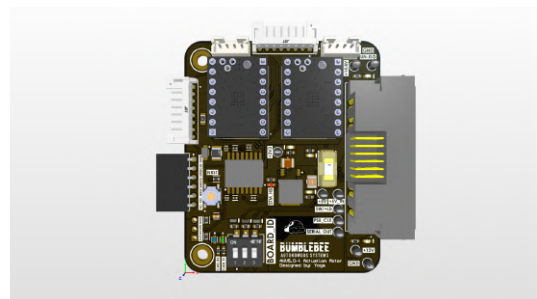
3D model of BBAUV 5.0 Actuation-Motor Board.
